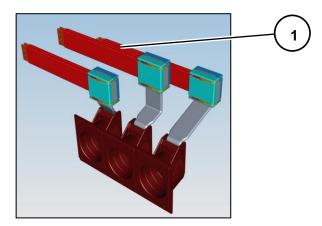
Detail view of busbar system with plastic tubes; right end panel as an example
